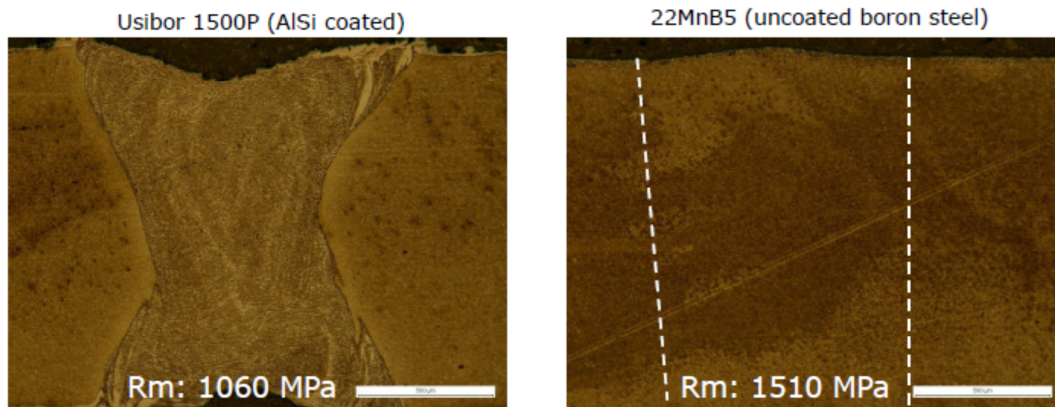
Laser welds made on Usibor (AlSi coated) and uncoated boron steel
